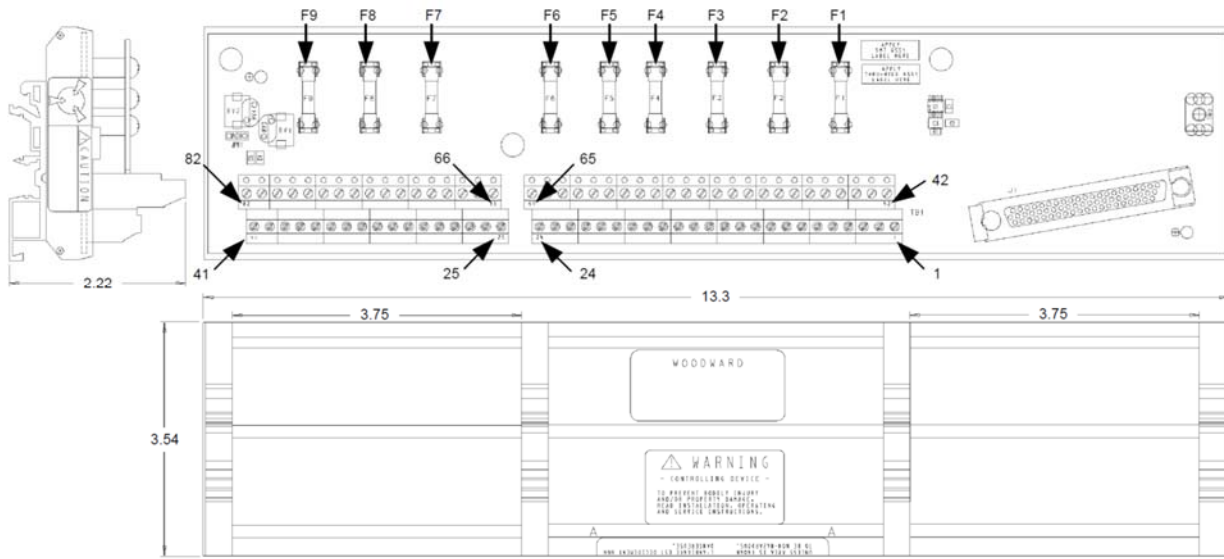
34Ch HDVIM FTM Outline Dimensions
